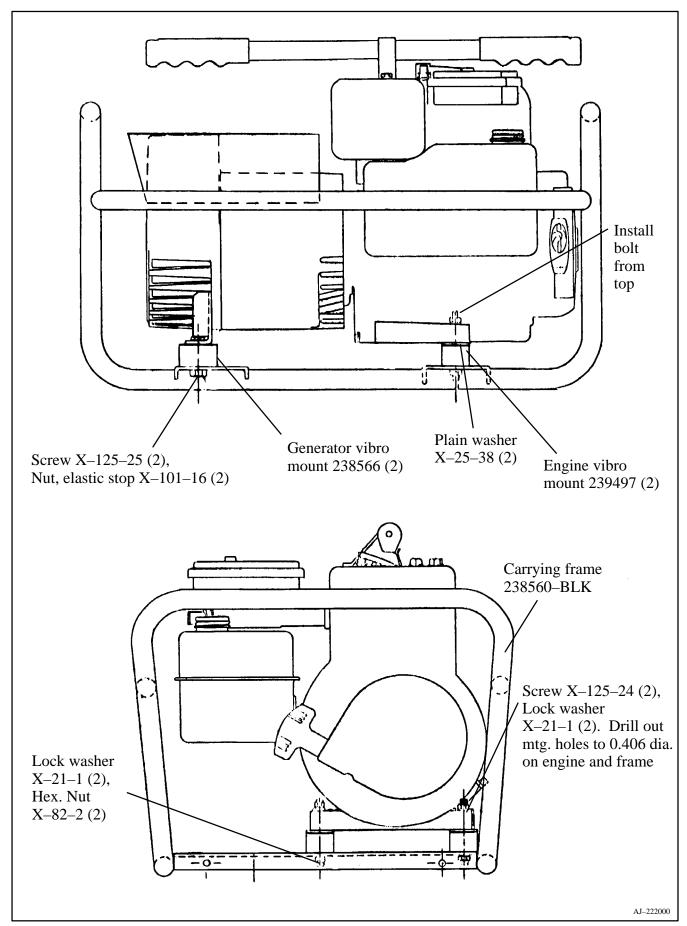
Mounting Carrying Frame Kit 2.25MBM Models
